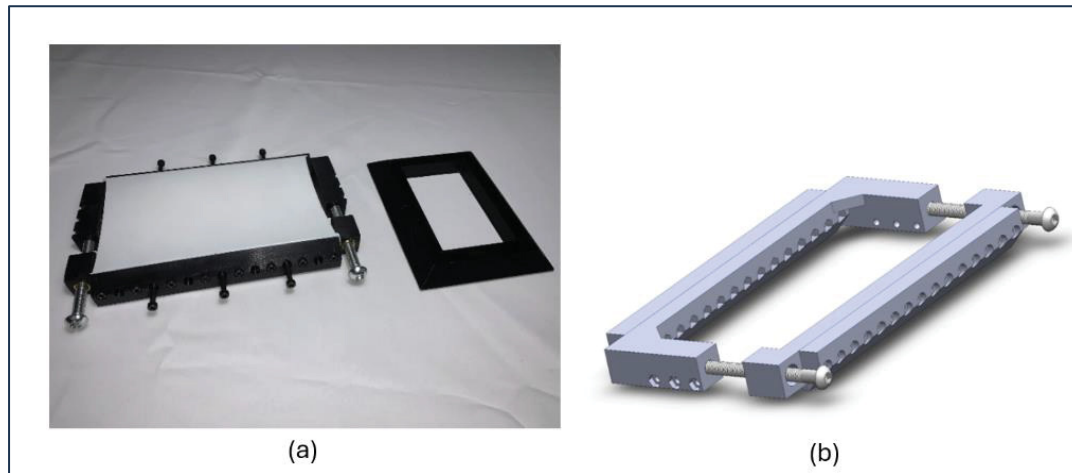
Schematics of pre-tensioning device for flexible skin. a) fabricated model, b) CAD design model
